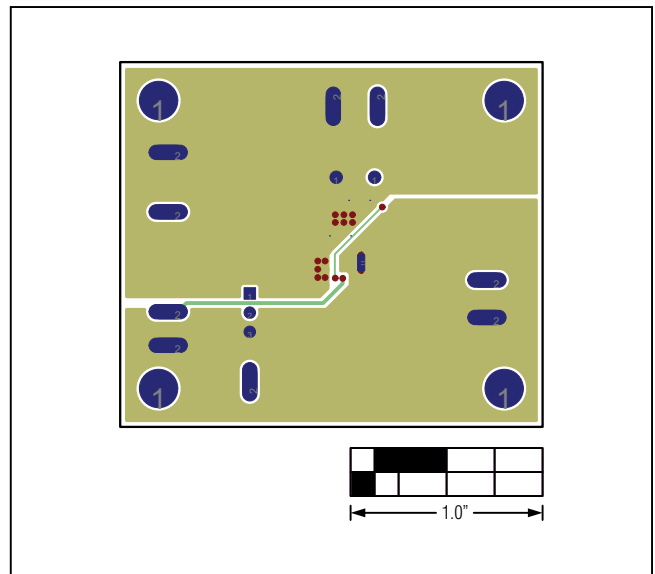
MAX17501A/MAX17501E EV Kits PCB Layout—Solder Side
